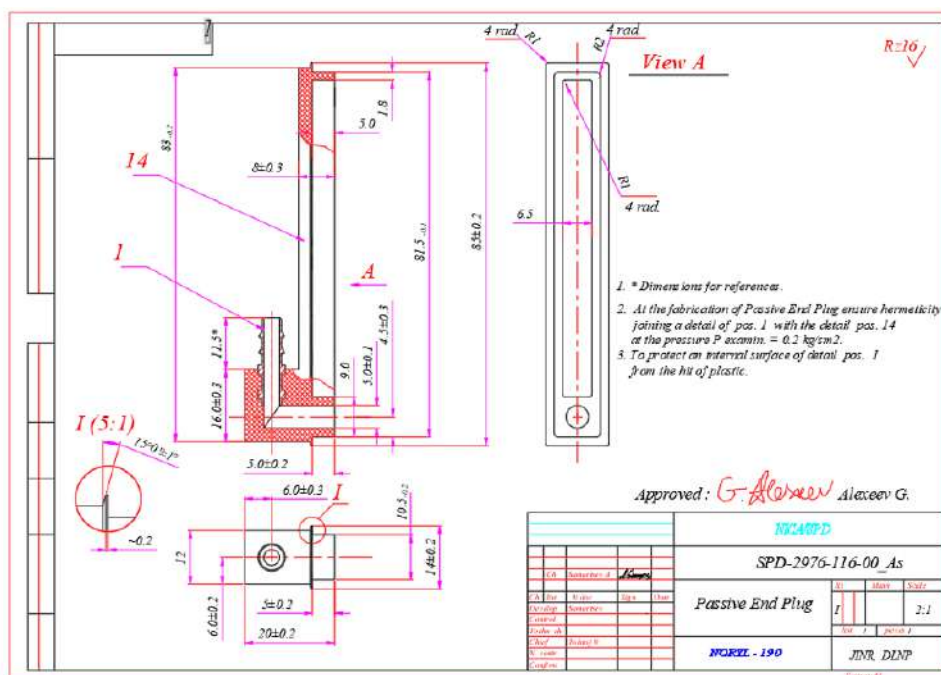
Drawing of passive end-plug which contains only gas connector.
